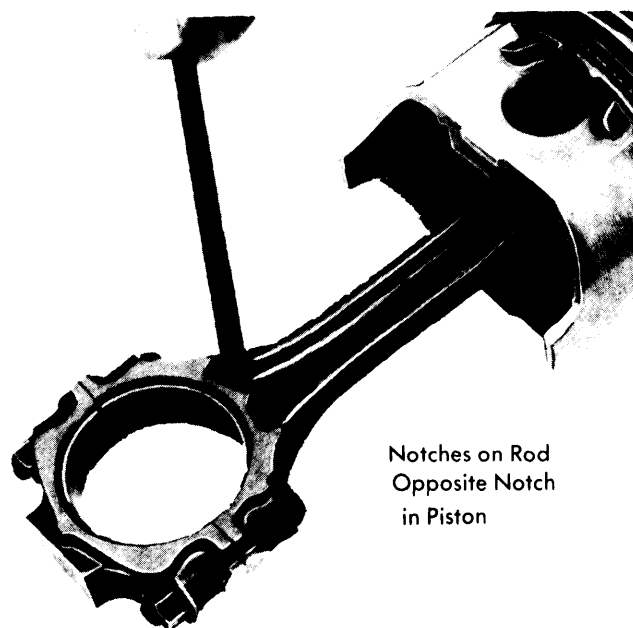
Making Sure Connecting Rod and Piston Assembly Are Properly Indexed
